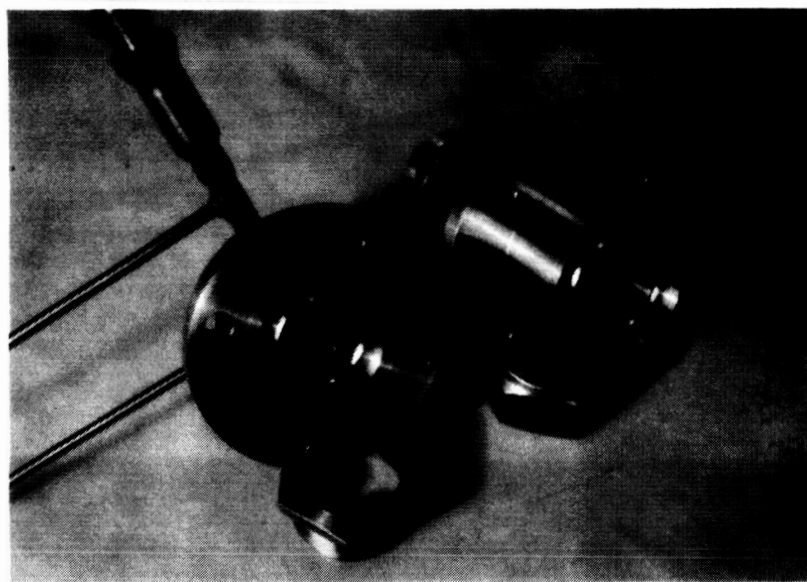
LARGE DIAMETER JET CONDENSER INJECTOR
